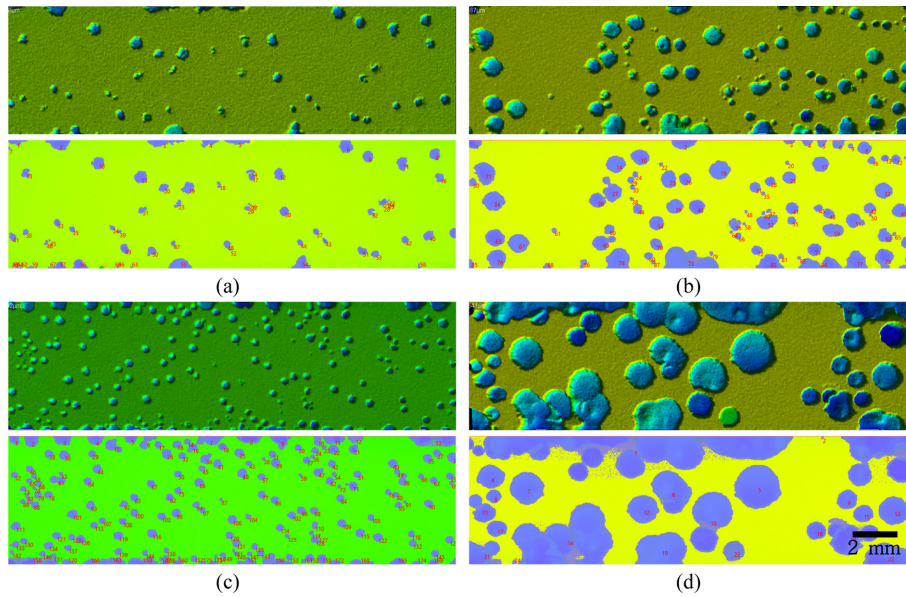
3D profile of parallel part of corroded specimens in Fig. 2: (a) specimen 4, (b) specimen 7, (c) specimen 10, (d) specimen 22
